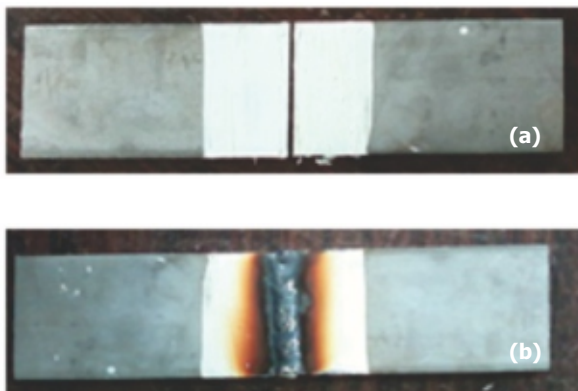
Base plates (a) before, and (b) after A-TIG welding with TiO_2 coating.
